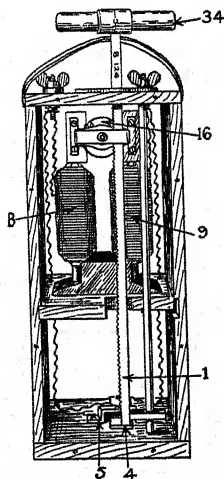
Working parts of a push-down blasting machine. 1, rack bar, showing teeth which engage the pinion; 4, the contact spring, which, when struck by the bottom of the descending rack bar, breaks the contact between two small platinum contacts, one on the upper face of the contact spring 4, and the other on the underside of the bridge 5, and in this way throws the entire current through the outside circuit, that is, leading wire, electric blasting caps, and connecting wire; 8, 9, field magnets; 16, revolving armature; 34, rack-bar handle.
